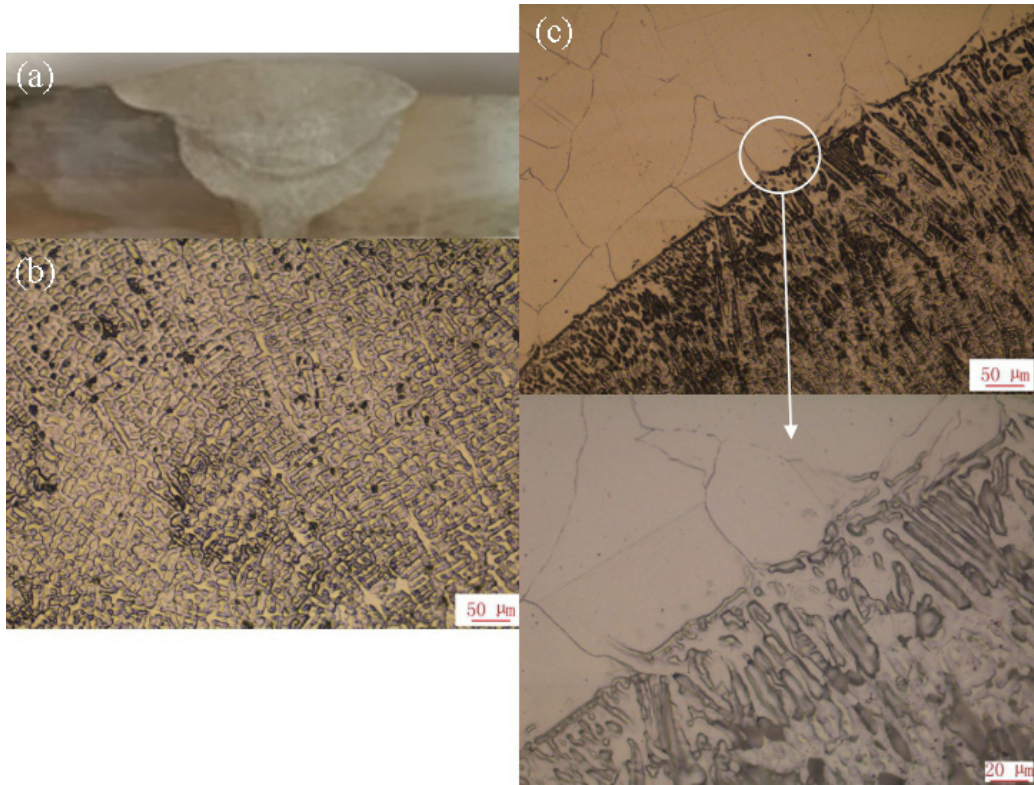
Micrograph of welded joint. (a) welded zone; (b) HAZ; (c) Fusion zone.
